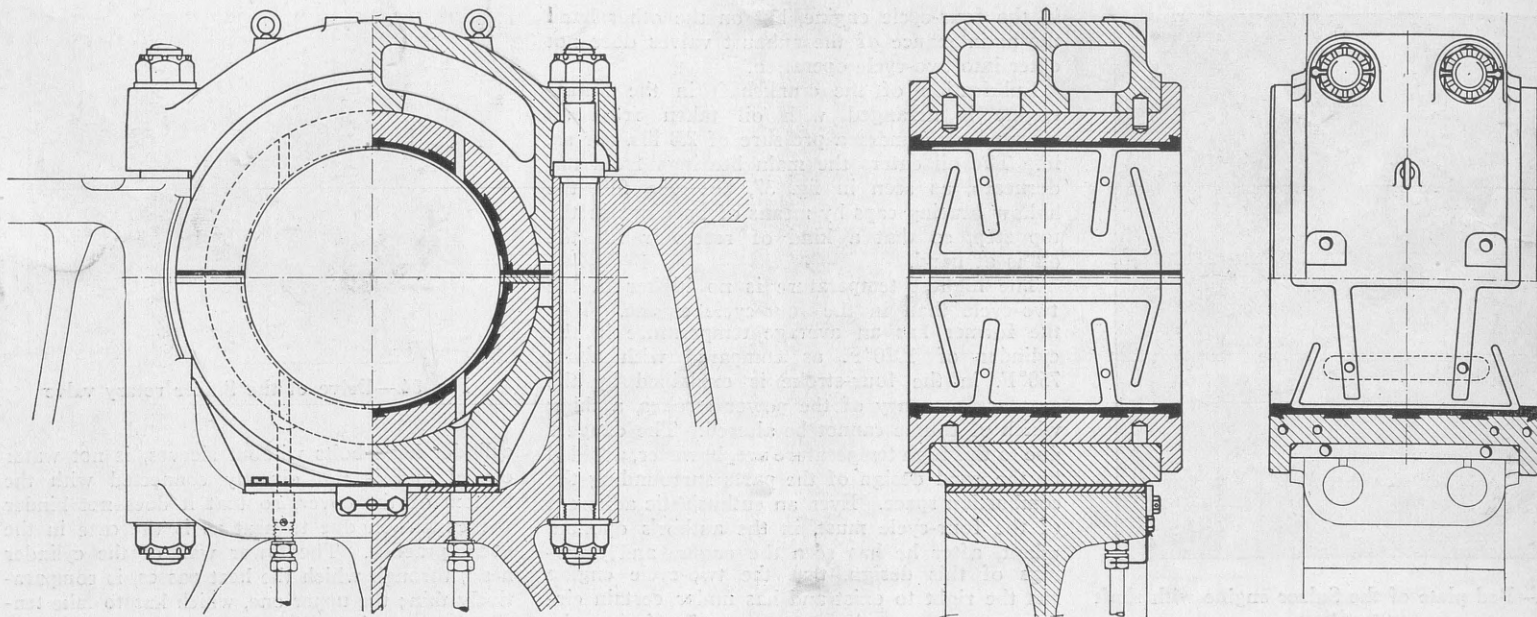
Sulzer main bearing, showing oiling arrangements
